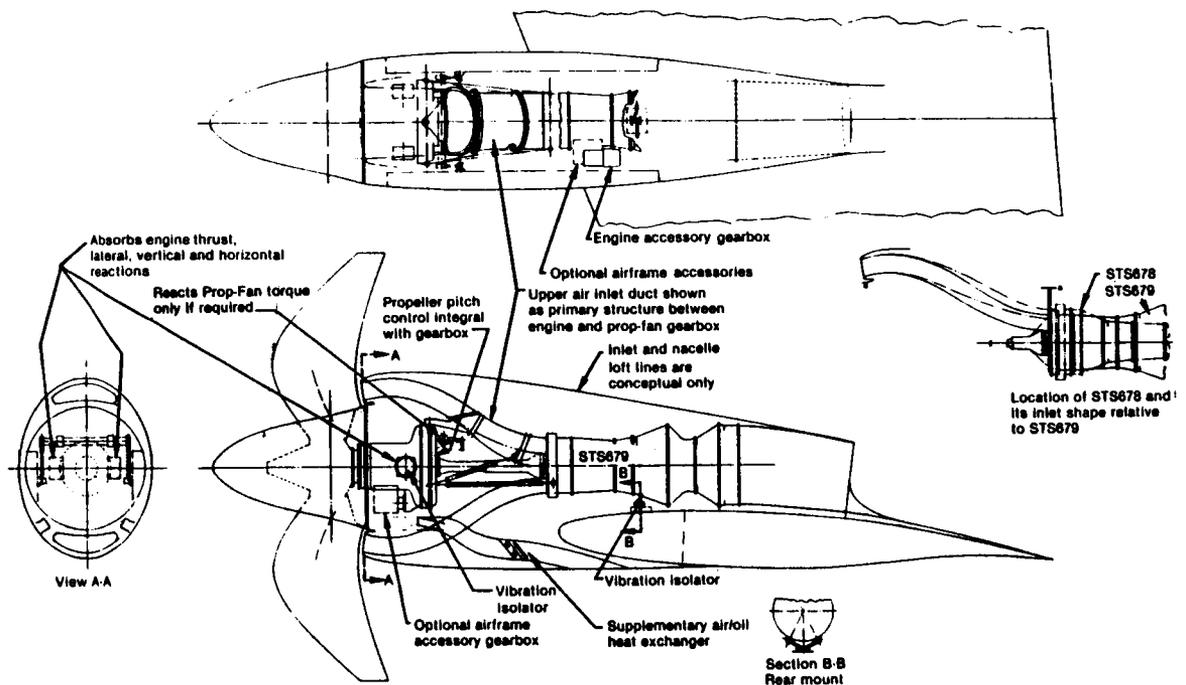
Conceptual Design Drawing of the Prop-Fan Propulsion System; In-Line Gearbox Installation - The drawing covers both the "free" and "non-free" power turbine engine configurations. (J27638-85)
